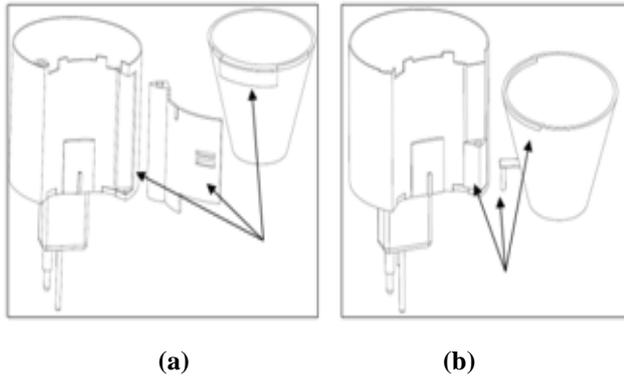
Eliminate filter holder by redesigning (a) old design (b) new design
